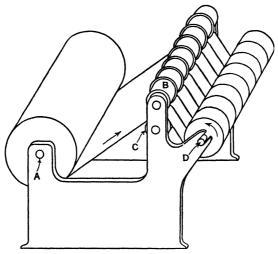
Slitting machine. Coated fabric is drawn under slitting knives B onto the "wind up" shaft at D.
